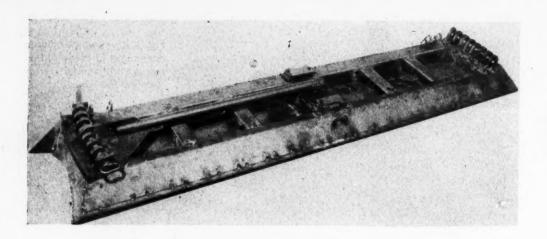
Welded construction of moldboard asembly which is subjected to a variety of stresses from s i m p le bending to complex torsion and bending
